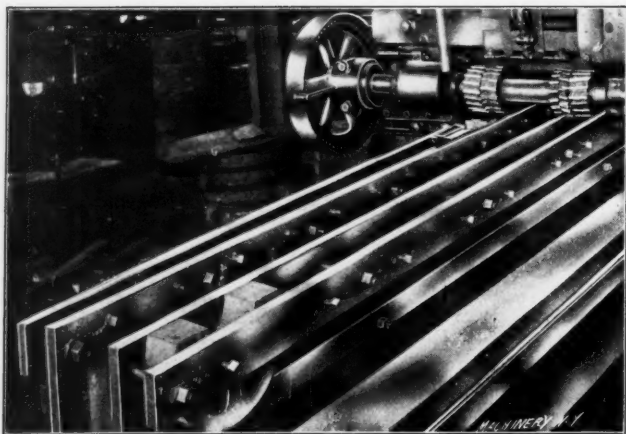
Fixture for Holding Eccentrics and Eccentric Straps while Milling the Ends
